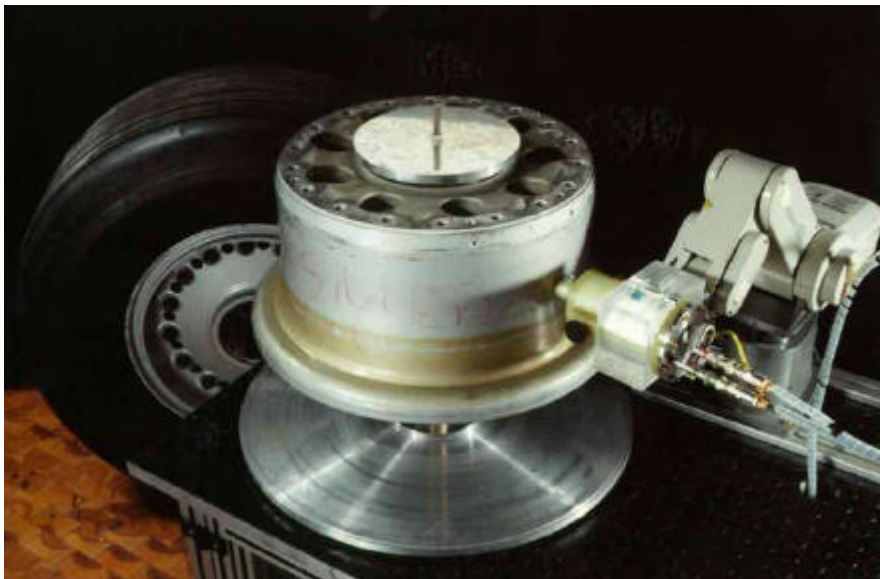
Setup for aircraft wheel testing with SQUID. The Joule-Thomson cold head with the SQUID mounted on top of the finger is moved along the wheel contour by a robot while the wheel is rotating.
